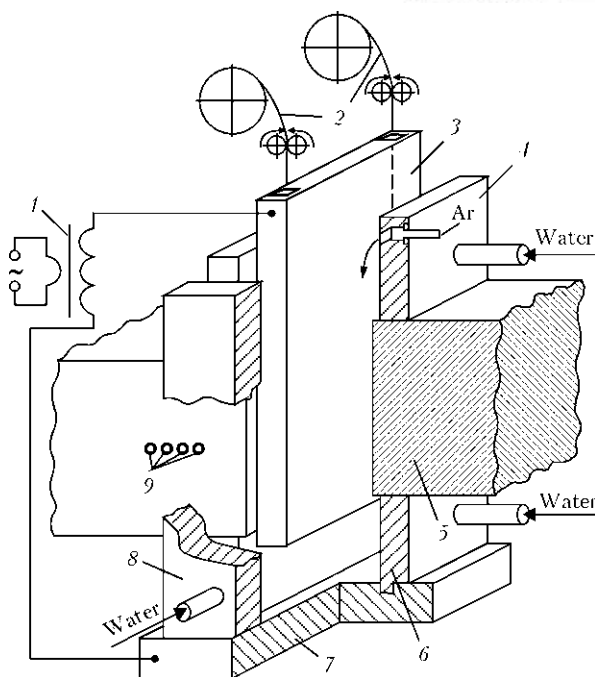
Scheme of assembly of specimens for ESW: 1 – power source; 2 – welding wire; 3 – consumable nozzle; 4 – run-out water-cooled forming strap; 5 – specimen being welded; 6 – run-in water-cooled forming strap; 7 – bottom plate; 8 – side forming device; 9 – holes for thermocouples
